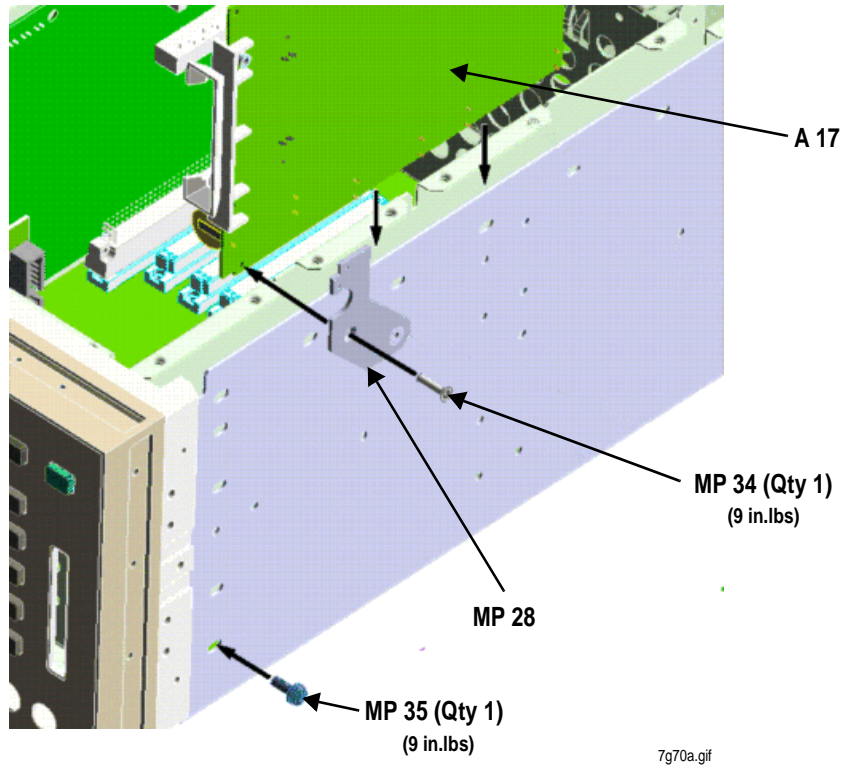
Removing the Memory Board (A17) and Mounting Bracket (MP28)
